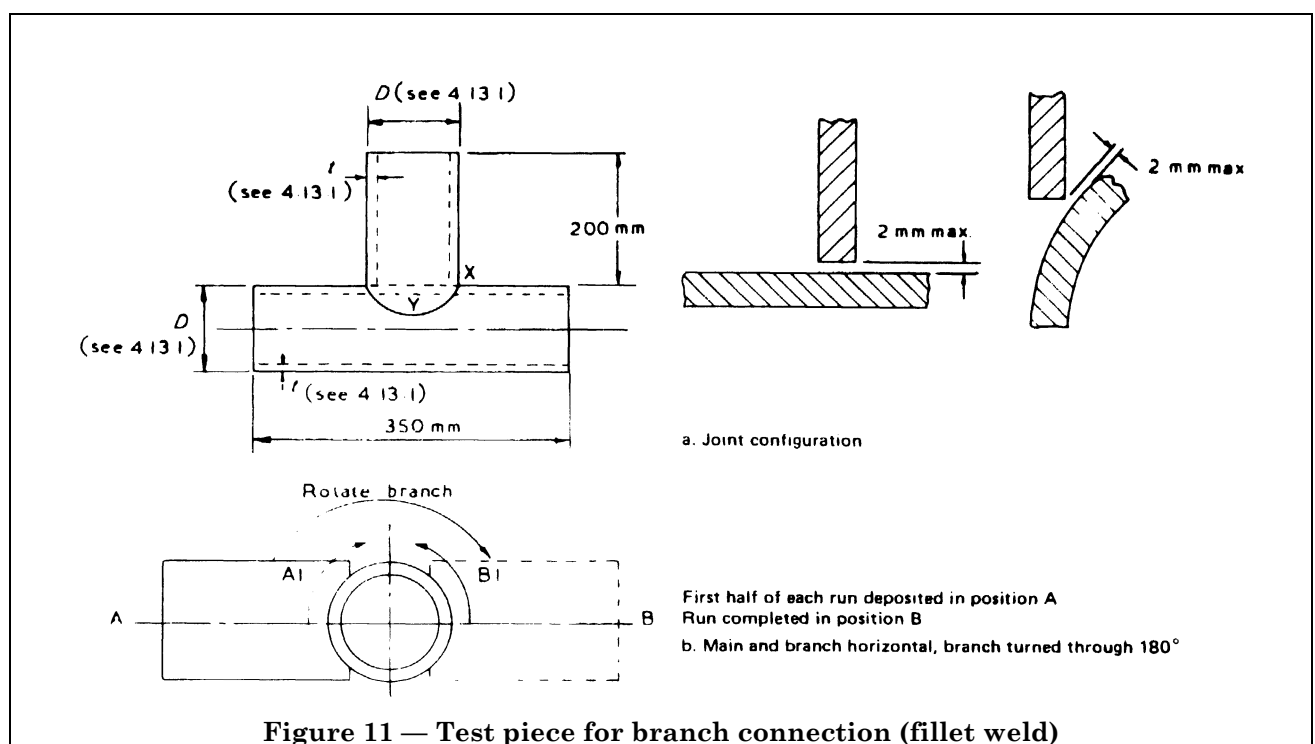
Test piece for branch connection (fillet weld)
